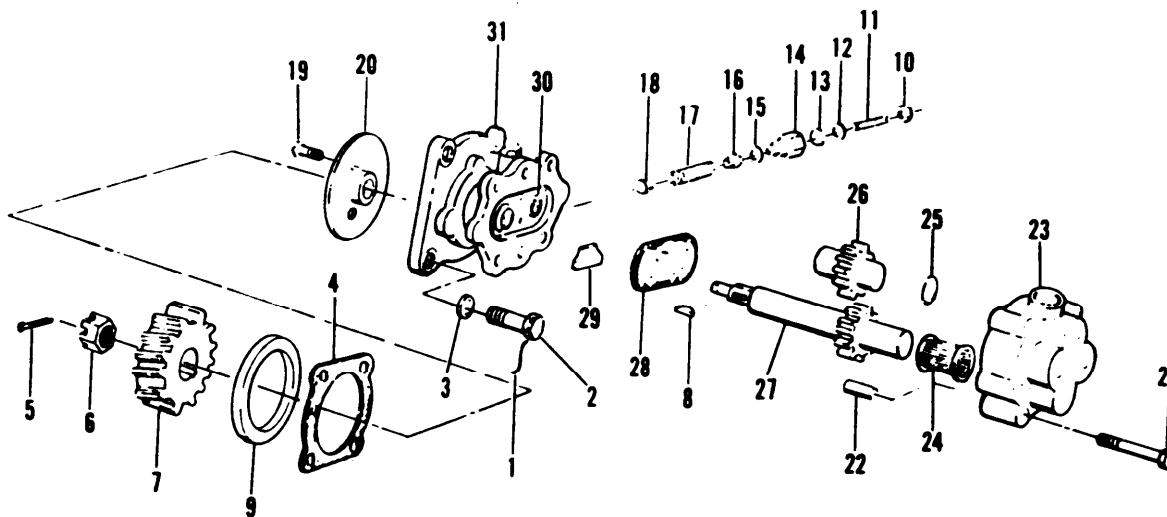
Hydraulic Pump Assembly, Exploded View
